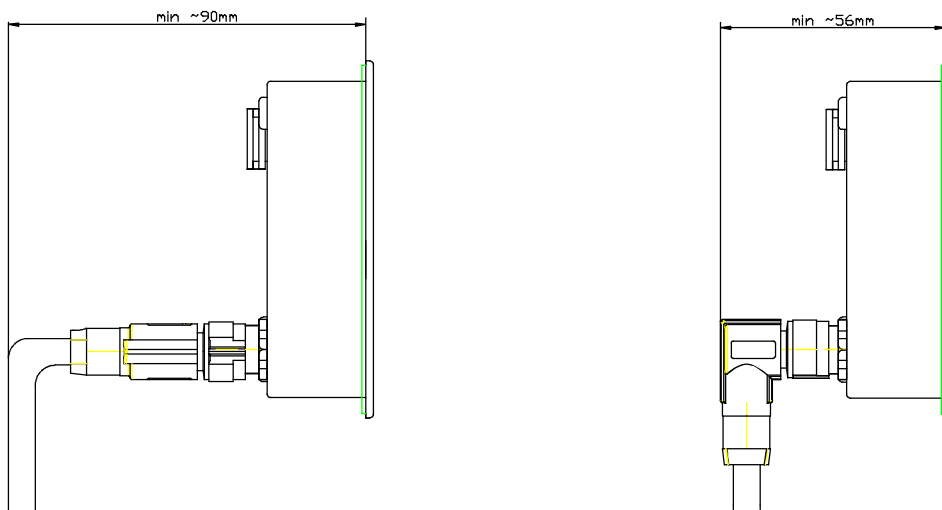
TDC130 mechanical drawing M12 connectors – minimum required space for mating connector
